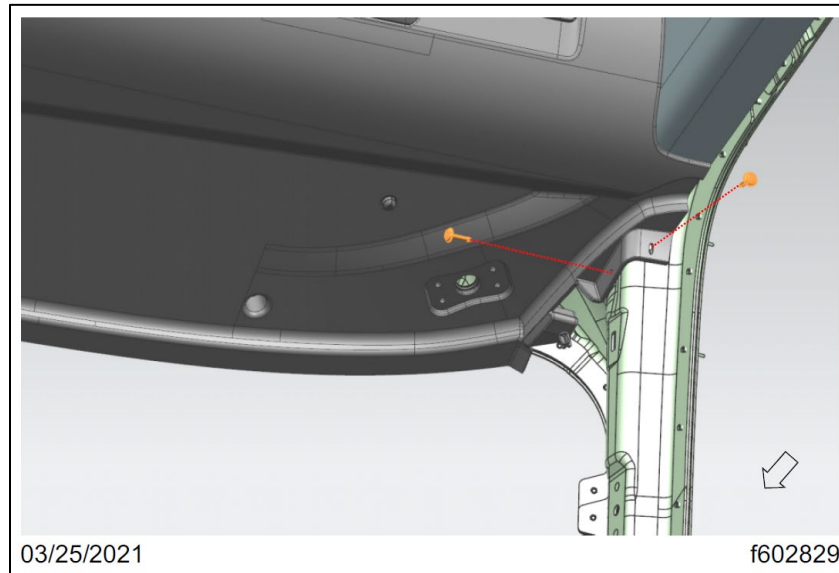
, Fasteners Attaching RH Side Overhead Storage Cabinet to the A-Pillar
